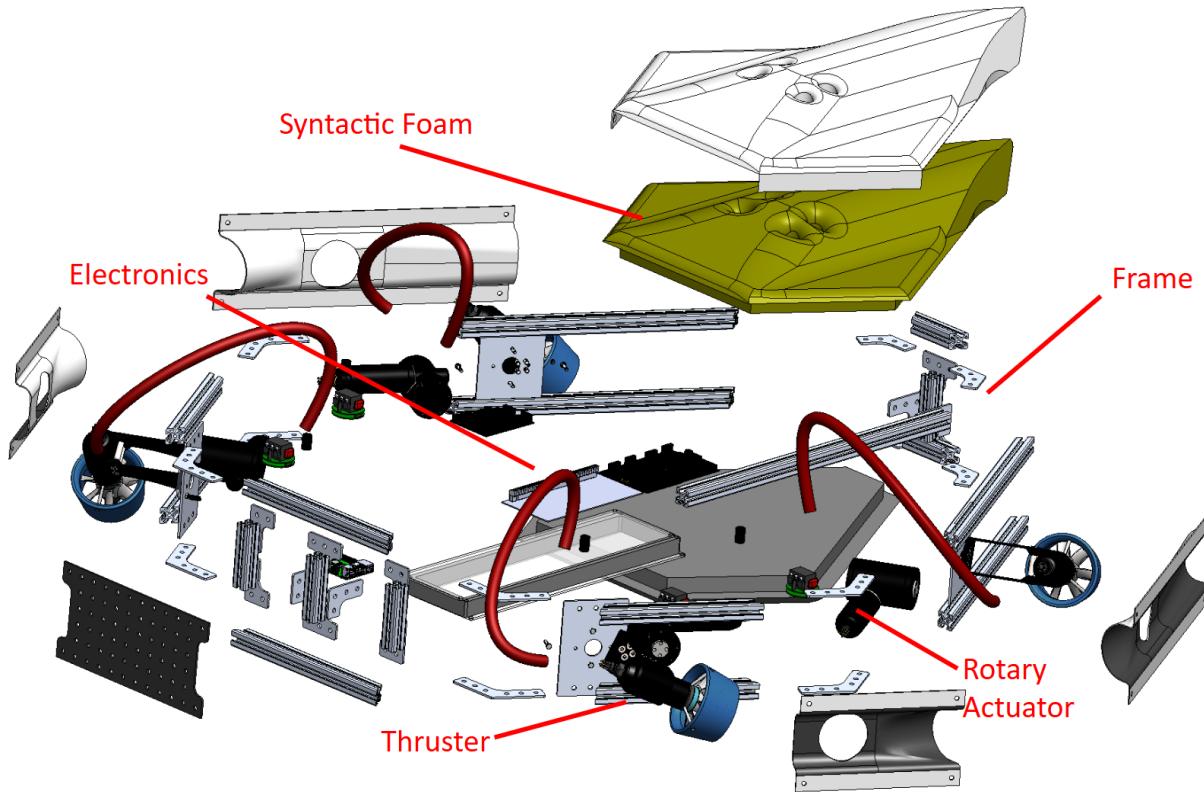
Exploded view of the ROV showing the key components of this phase of the design project. (team-fig)
